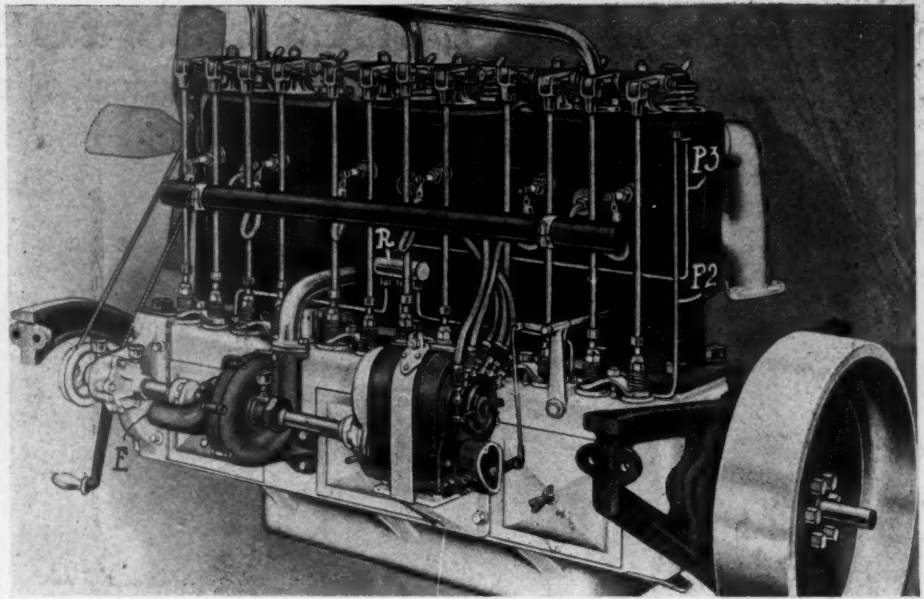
LUBRICATING PIPES ON STANDARD CAR
